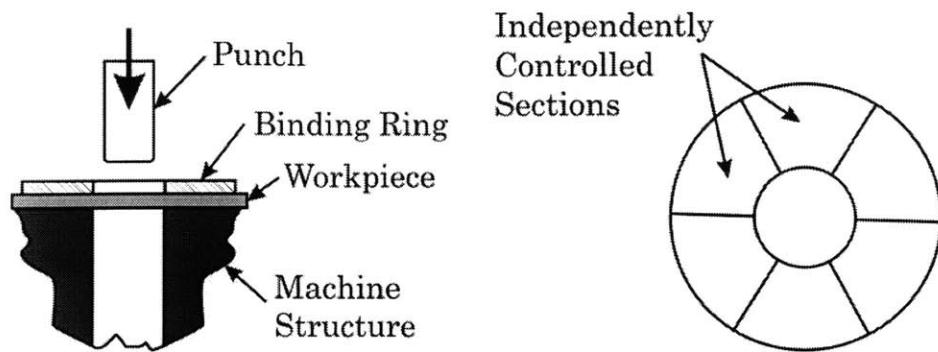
Deep drawing process schematic (left), Segmented binding ring (right).
